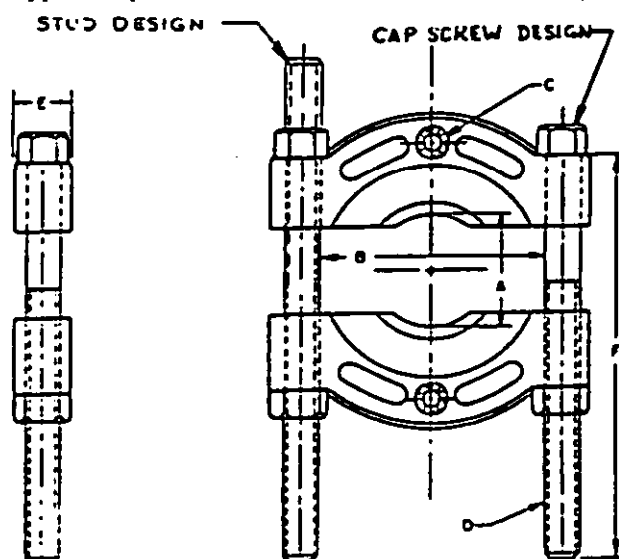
Type XII, puller attachment, mechanical, bearing, external.
